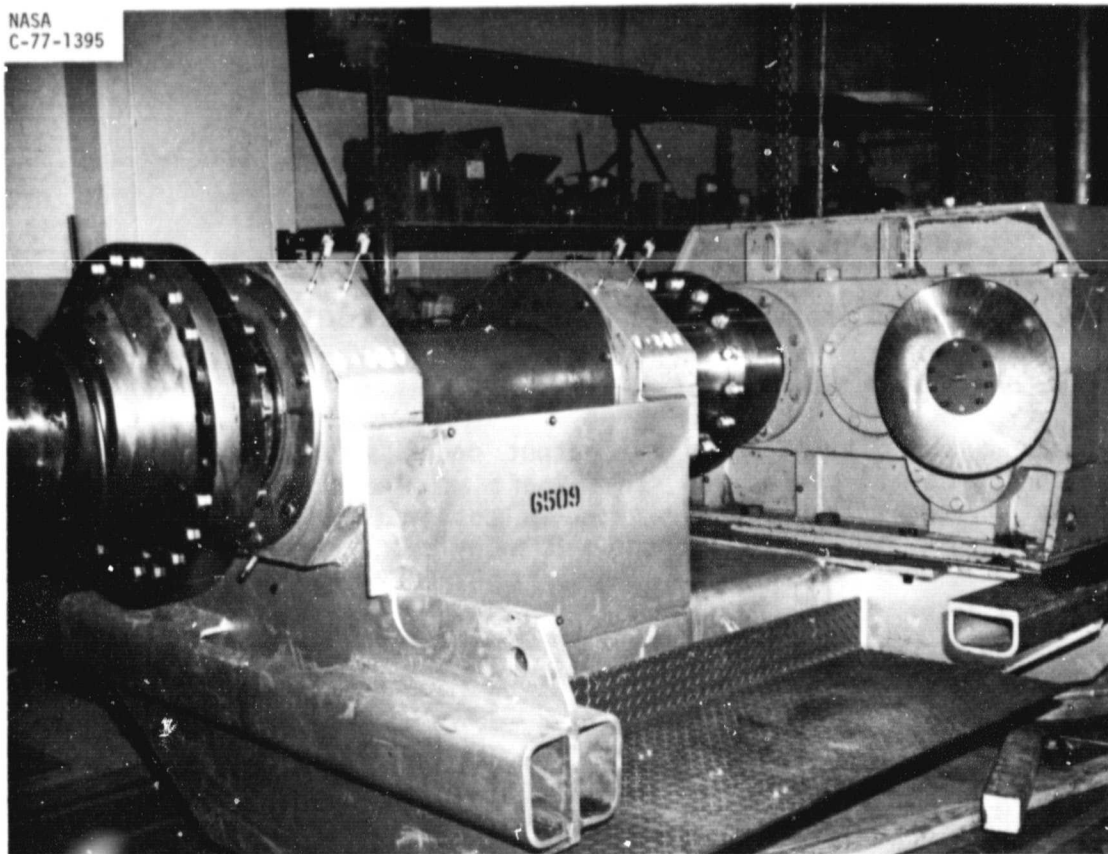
Low Speed Shaft, Bearings, Bearing Housings, and Coupling
